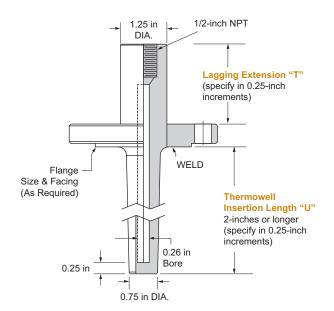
PTB-P2, P1, P3 Heavy Duty Protection Tube - for heavy wall construction applications.
